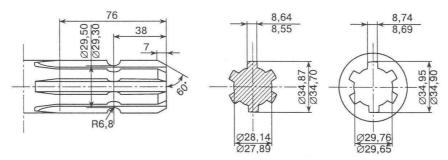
PTO shaft dimensions in PRONAR - type 1 according to PN-ISO 500
